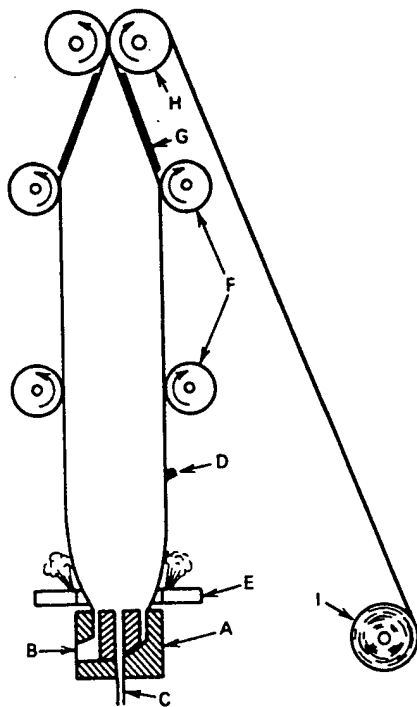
Extrusion of blown film (4). A, blown-film die. B, die inlet. C, air hole and valve. D, plastic tube (bubble). E, air ring for cooling. F, guide rolls. G, collapsing frame. H, pull rolls. I, windup roll. Courtesy of Society of Plastics Engineers.
